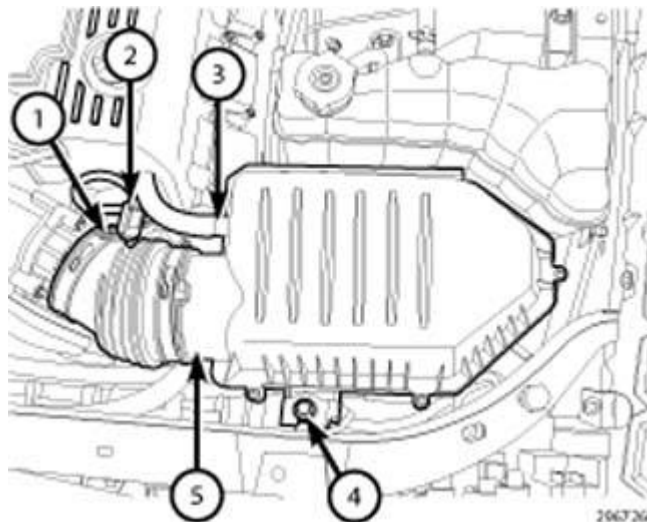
Air Duct Retaining Clamp, Intake Air Temperature Sensor Electrical Connector, Makeup Air Hose, Bolt & Air Cleaner Housing
